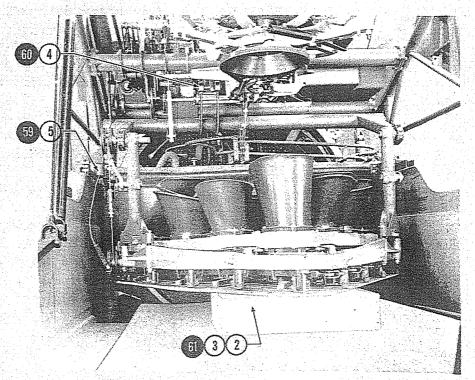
4 to 1 Shaft, Removal and Installation Sequence
